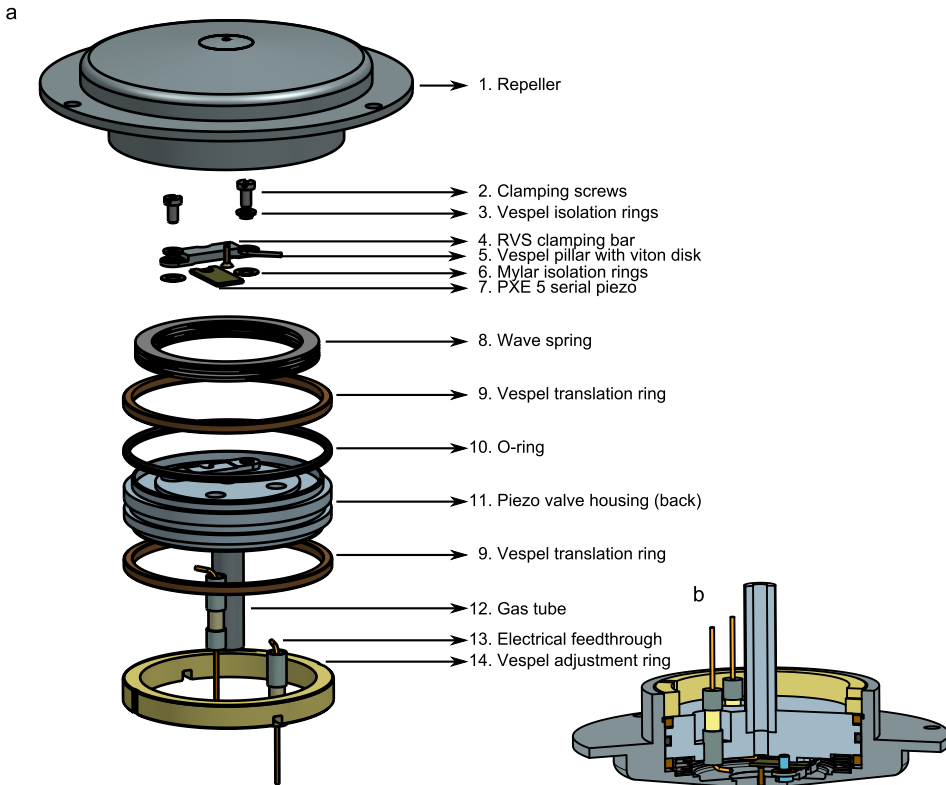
a) Expanded view of the pulsed piezo valve. 1.Repeller. 2.Clamp-
